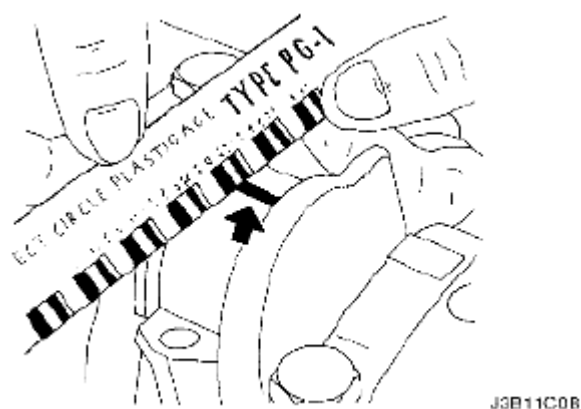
Locating Bearing Clearance For Permissible Tolerance Ranges
